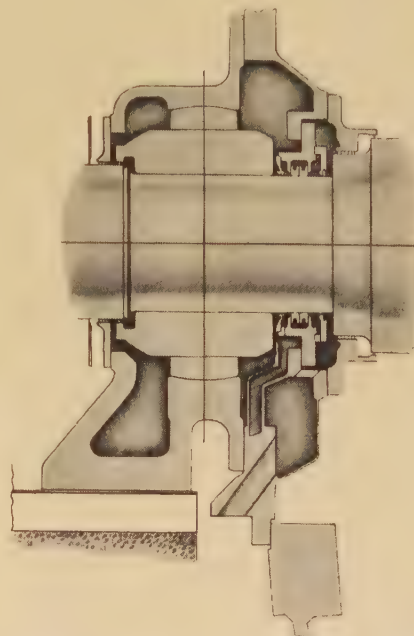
Section view of pedestal bearing and shaft gland seal for a hydrogen-cooled generator
